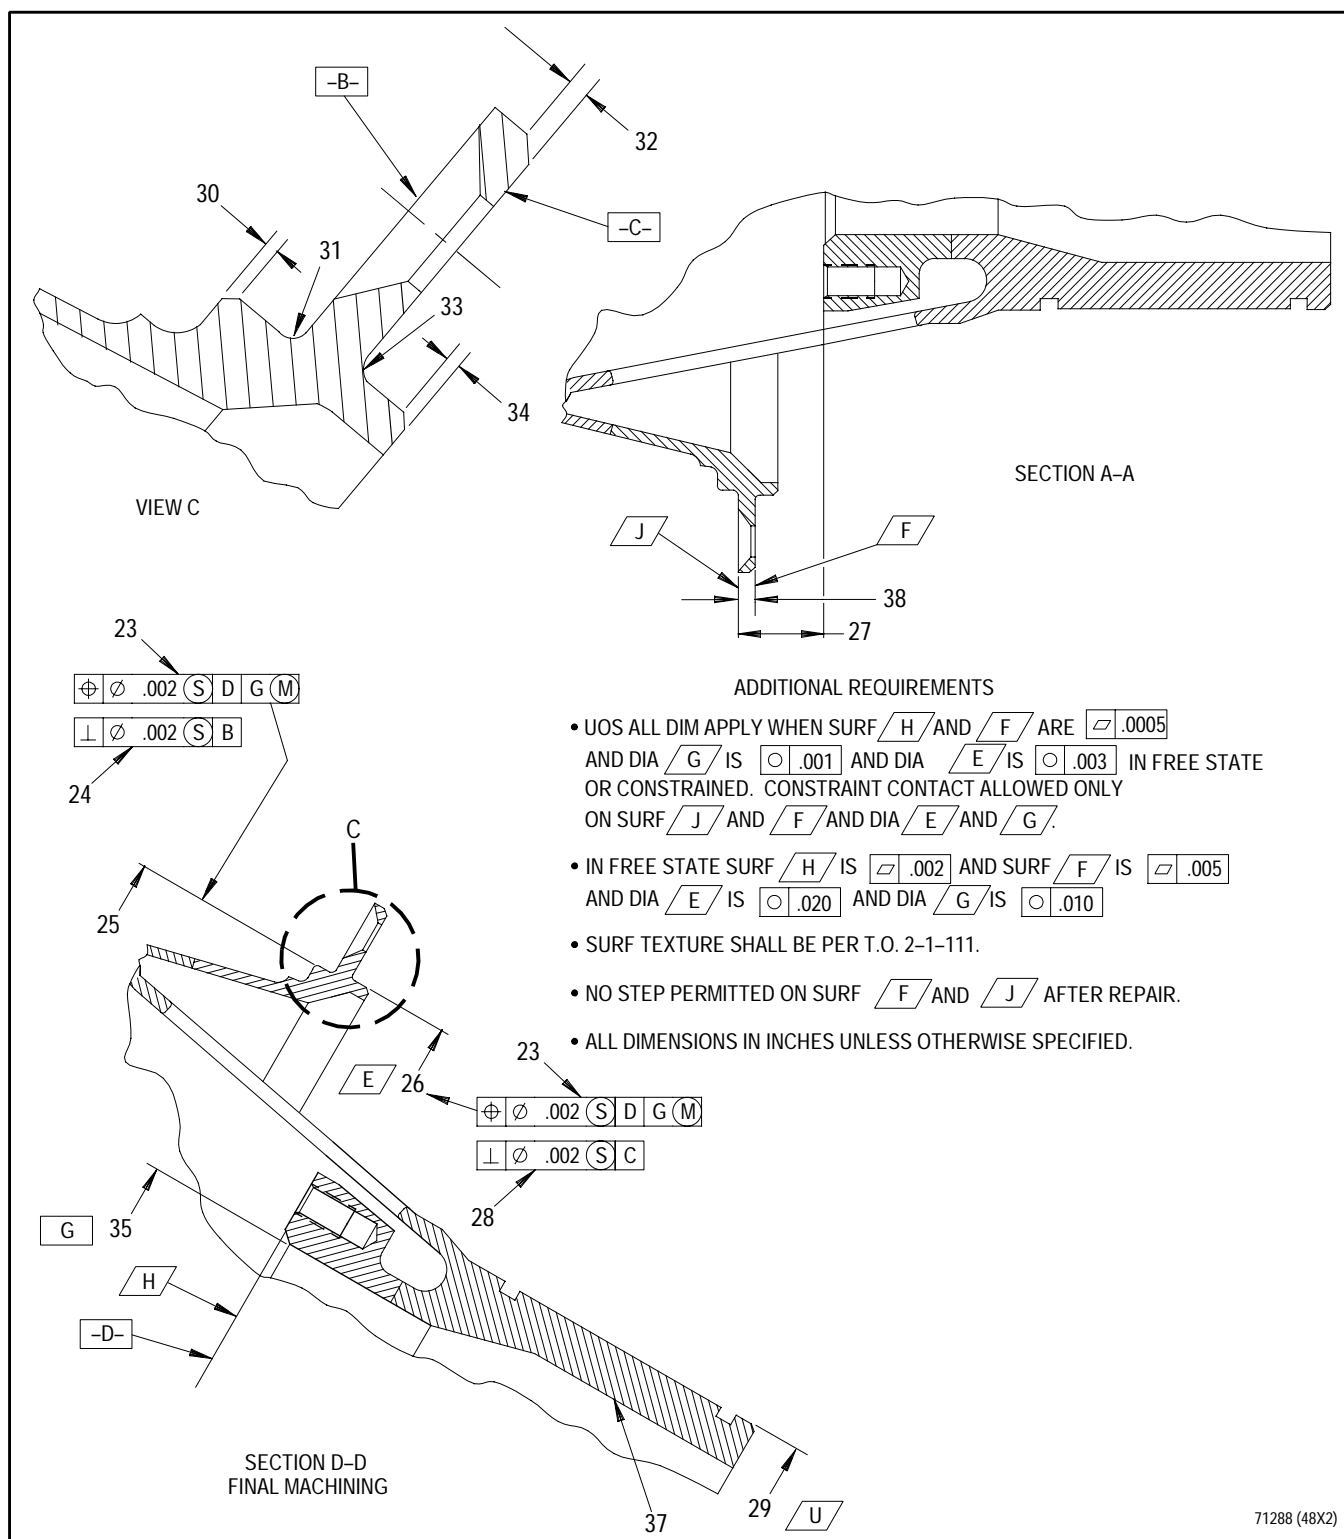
No. 3 Bearing Support Assembly - Snap Diameter and Front and Rear Flange Surface Repair
